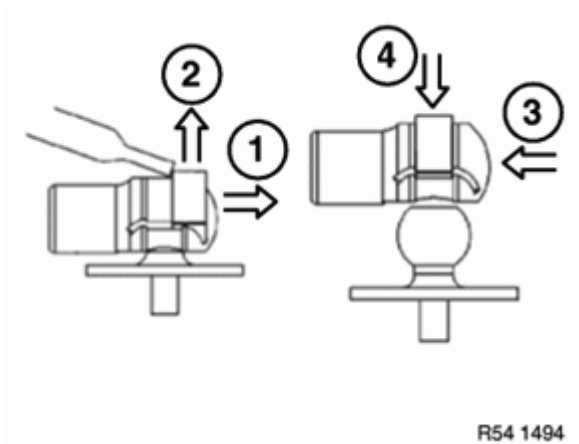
Pushing On Retainer In Direction Of Groove With Screwdriver
